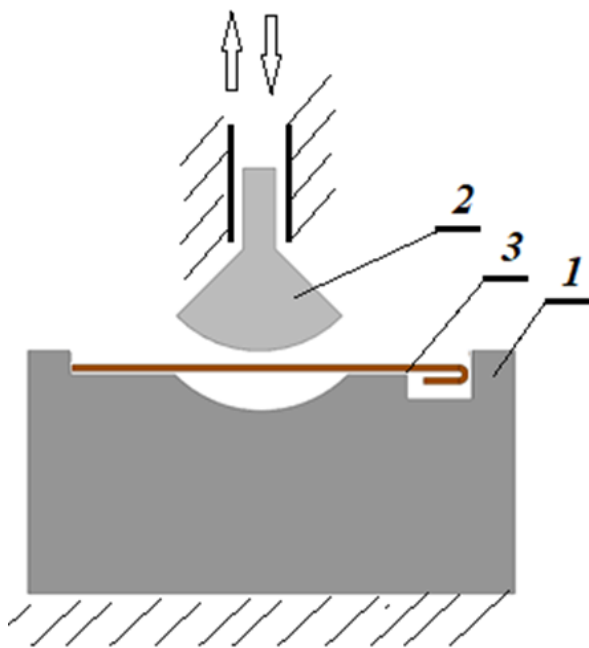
Bending device: 1 – Die; 2 – Punch; 3 – Cylinder sector segment.
